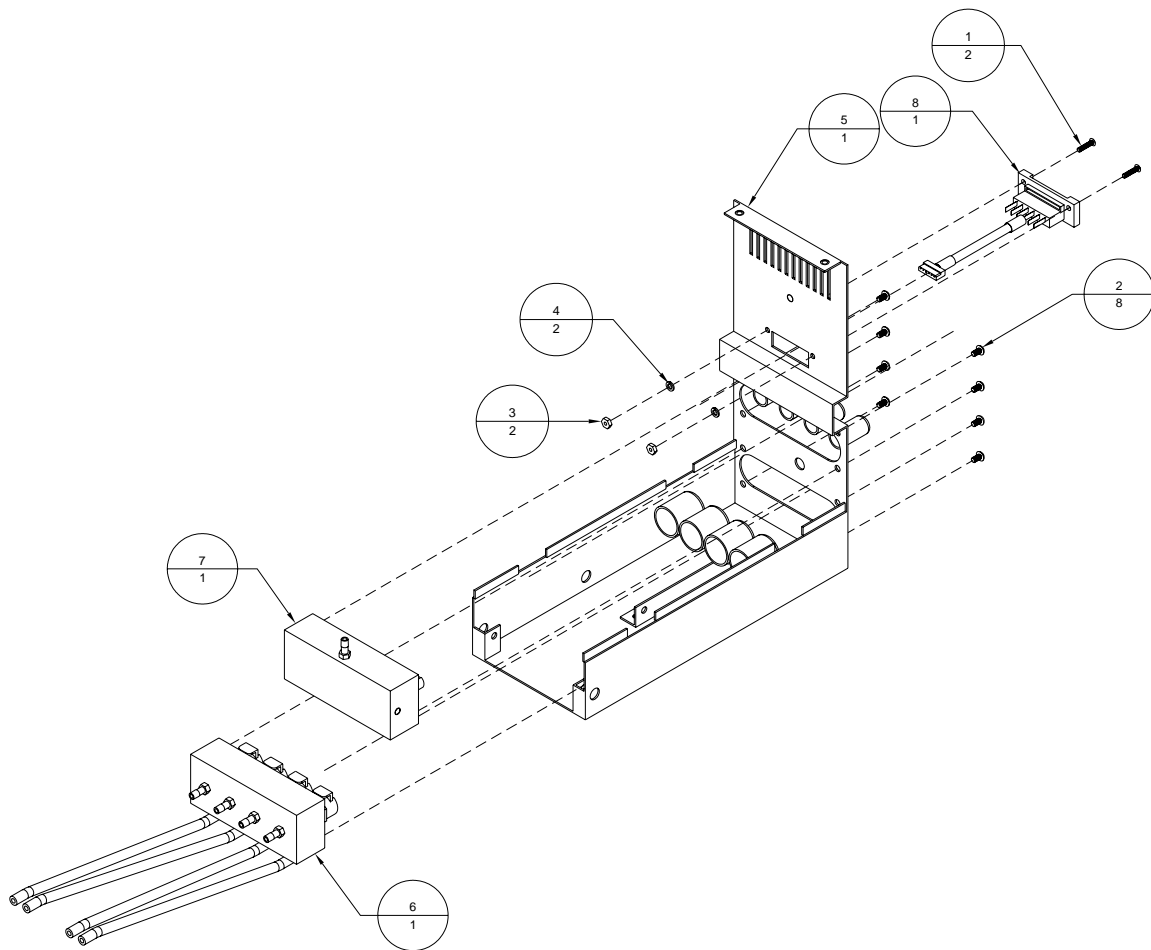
Pressure Regulator Main Chamber Assembly (9101862A)
